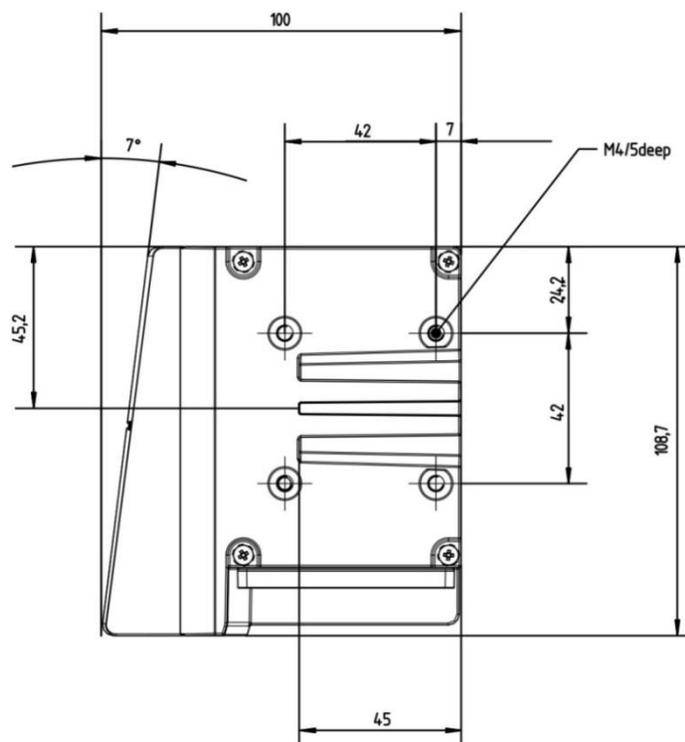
Dimensioned drawing of rear of BE 901 SSI
